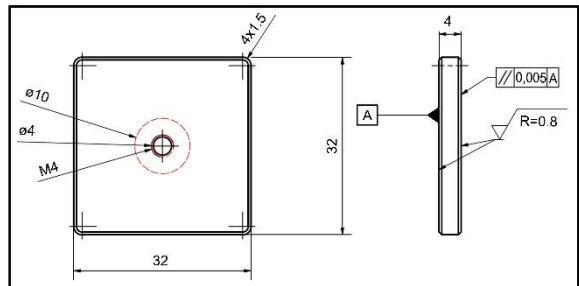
Geometry of the plate samples for the oscillating sliding wear tests.
